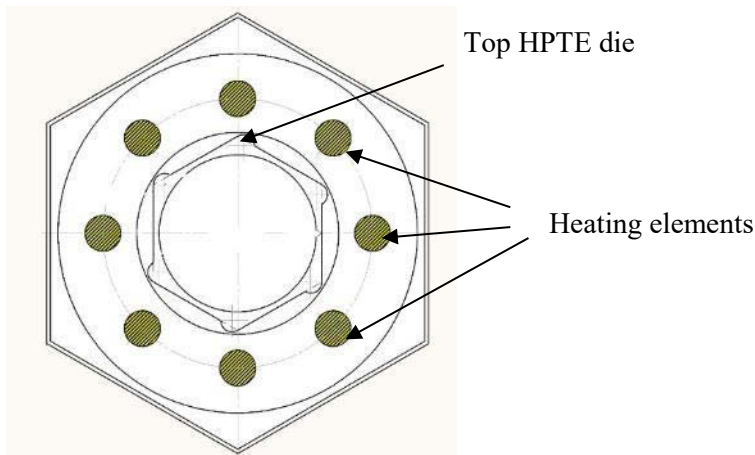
Scheme of the heating elements (marked by shaded areas) location in the top part of the HPTE machine. Top view.
